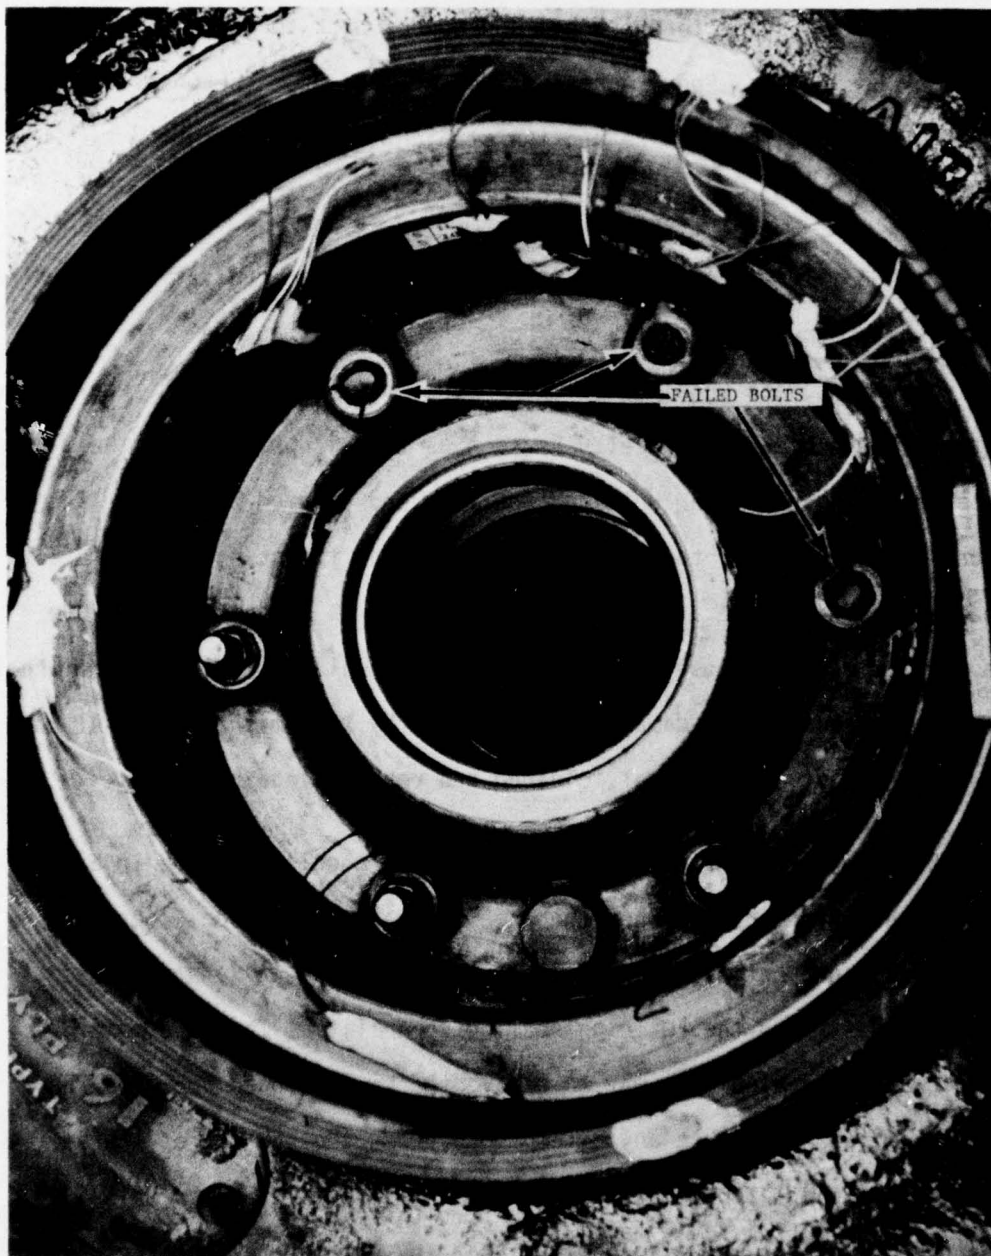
Fatigue Failure of 3 Wheel Bolts at 1093 Miles
